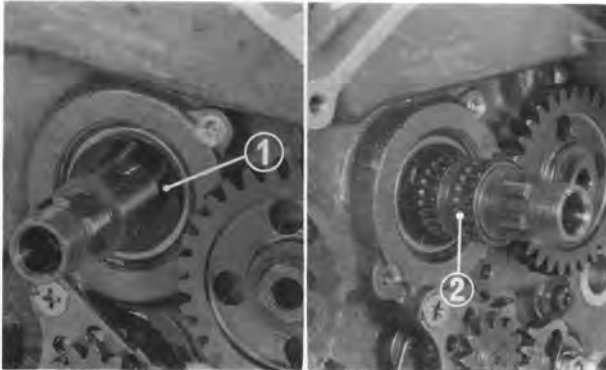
(1) Thrust washer (2) Needle bearing
